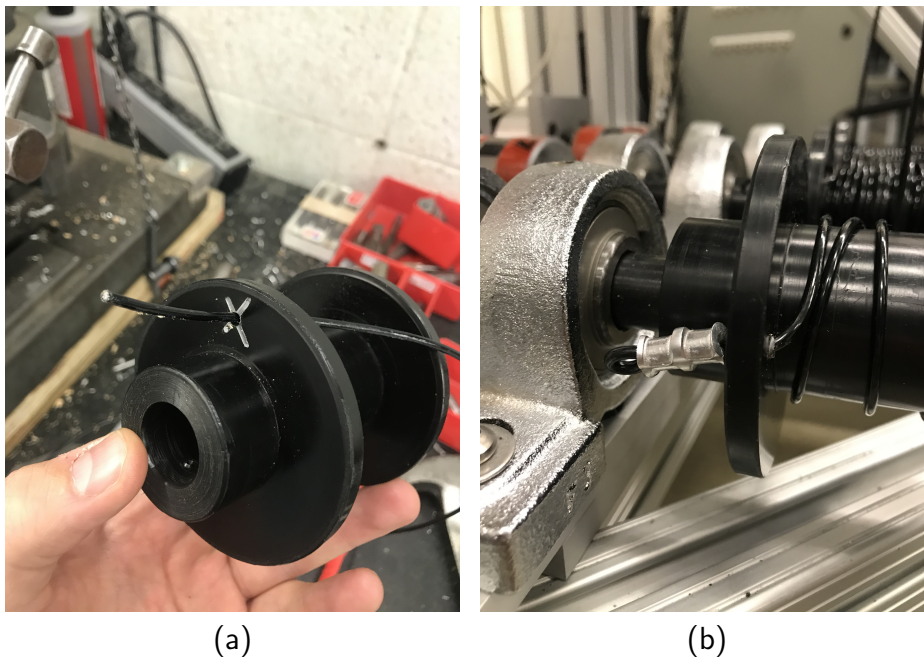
(a) Detail showing the hole on the frontal surface of the drum. (b) Detail showing the oval sleeve compressed that block the cable passage and avoid the slipping.
